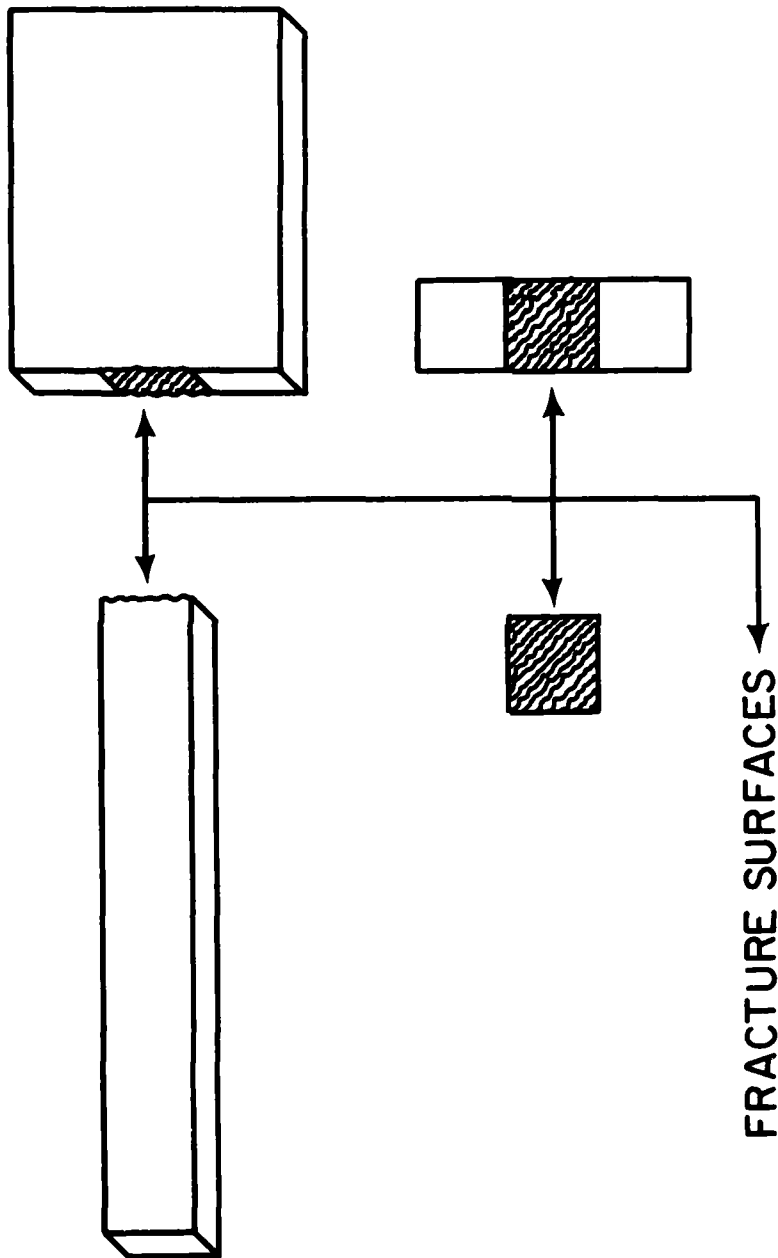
SCHEMATIC REPRESENTATION OF FRACTURE SURFACES
